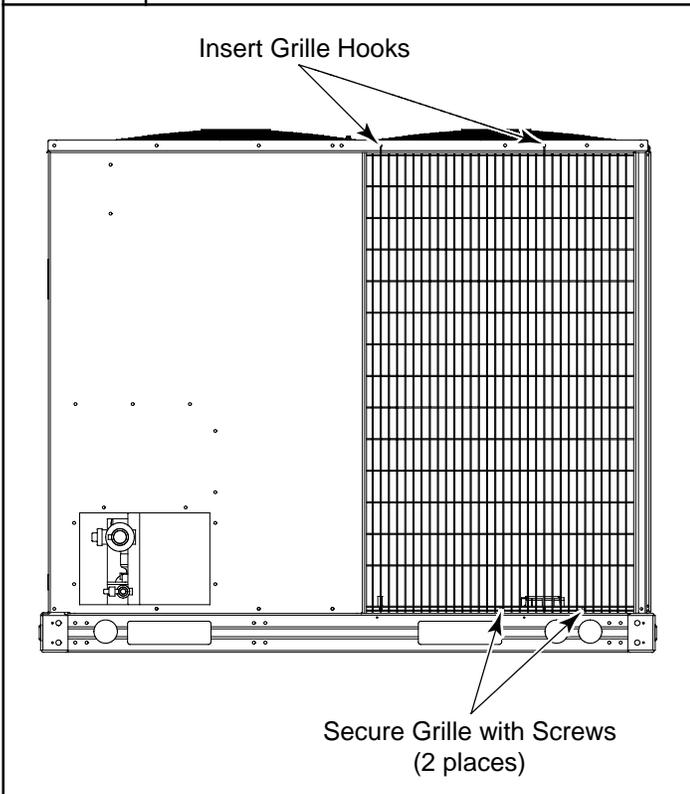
Typical 2 - Sided Coil Grille Installation
